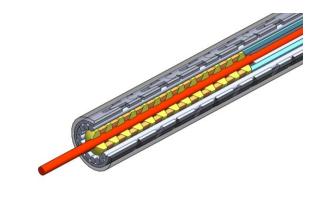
A cutaway view of the multiple assembly layers of the cable ring grasper laparoscopic instrument.
